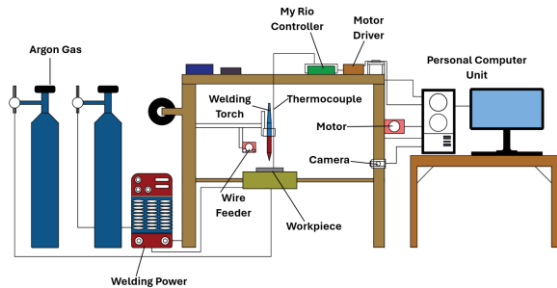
The setup of testing the WAAM-based TIG welding.
